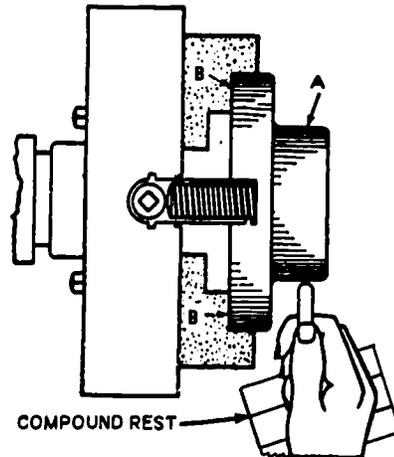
shows a rough casting mounted in a four-jaw independent lathe chuck on the spindle of the lathe. Before truing the work, determine which part you wish to have turn true. To mount a rough casting in the chuck, proceed as follows:
